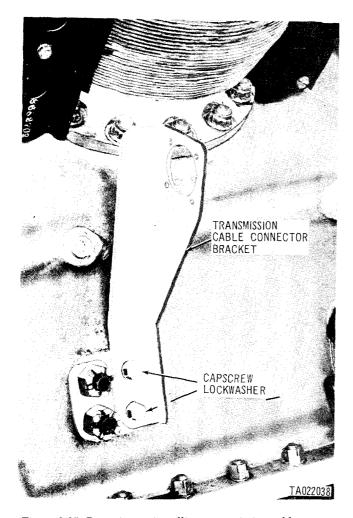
Removing or installing transmission cable connector bracket, model AVDS-1790-2C and AVDS-1790-2D engines.
